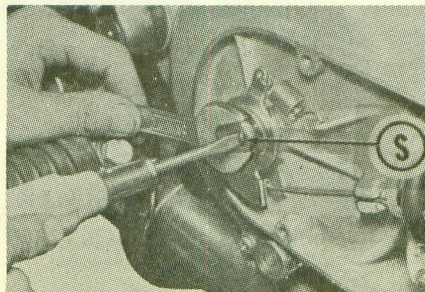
The clutch adjusting screw (S) is located under the cover on right side of engine.
